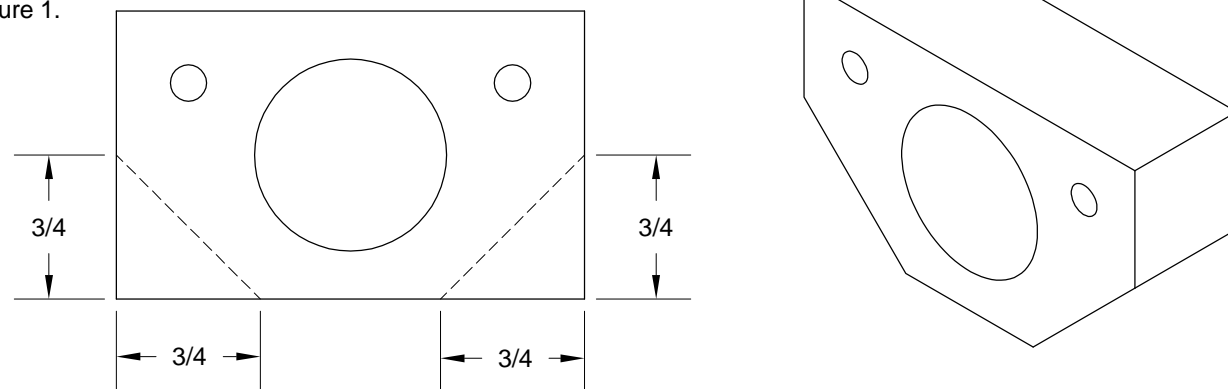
TRIMMING THE F-1262 FLAP HANDLE BLOCKS
